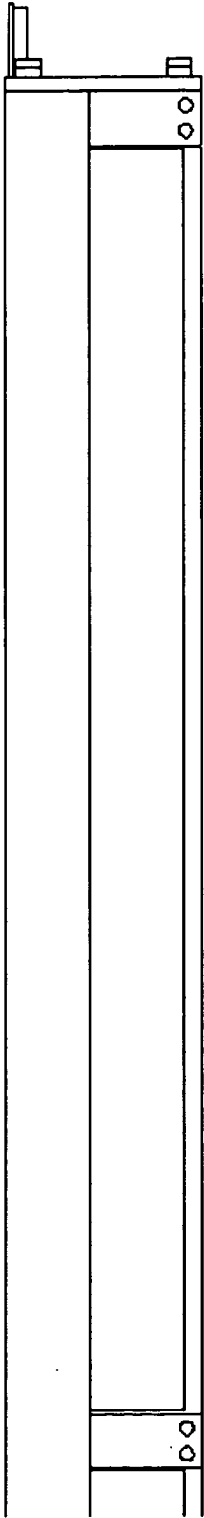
B: the ceiling frame front view on its left (40 foot high cube collapsible cargo container)
